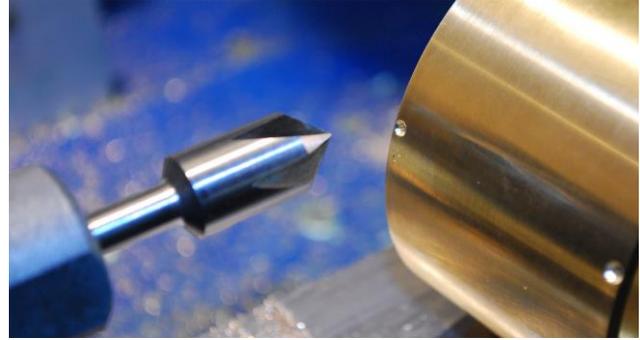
The flange screw holes are countersunk so the flat head machine screws sit flush with the barrel surface. A countersink bit is mounted in the lathe and slowly turned while the barrel is positioned by hand.
